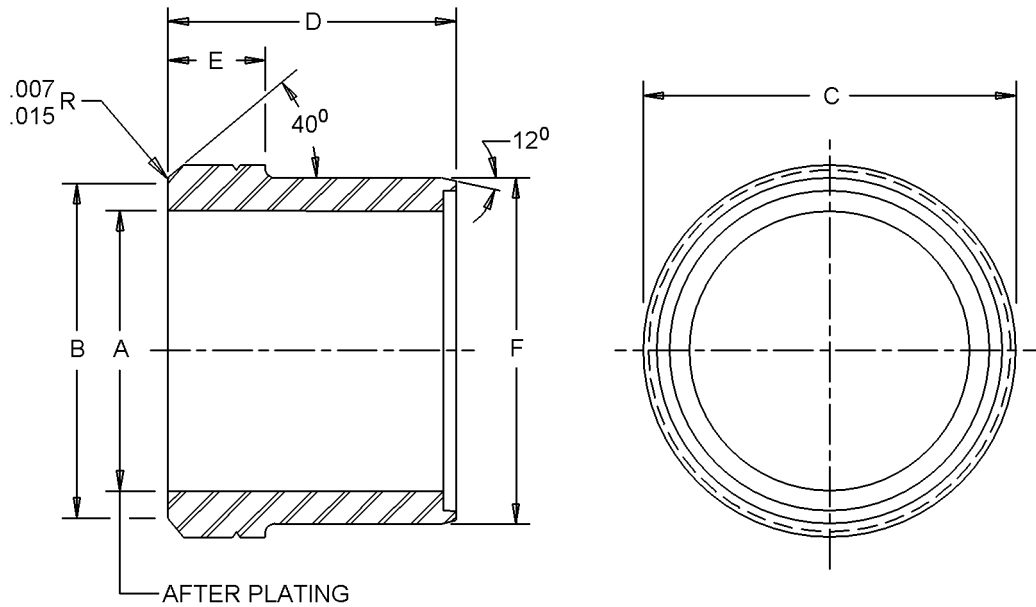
Sleeves, compression, tube – hose fitting – safety sleeve type.
